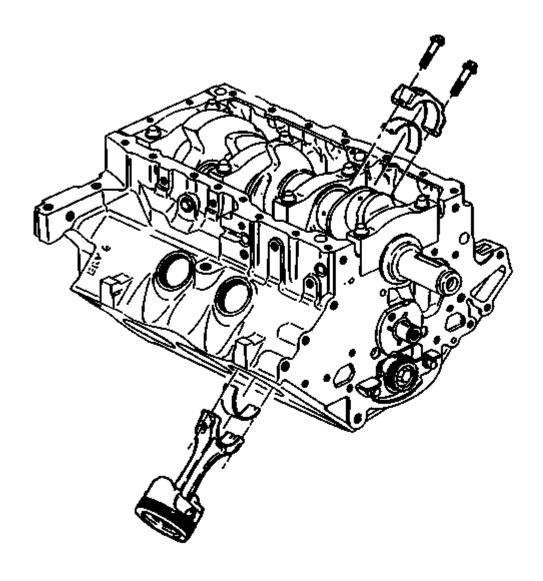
Connecting Rod Bolts & Cap Courtesy of GENERAL MOTORS CORP.
